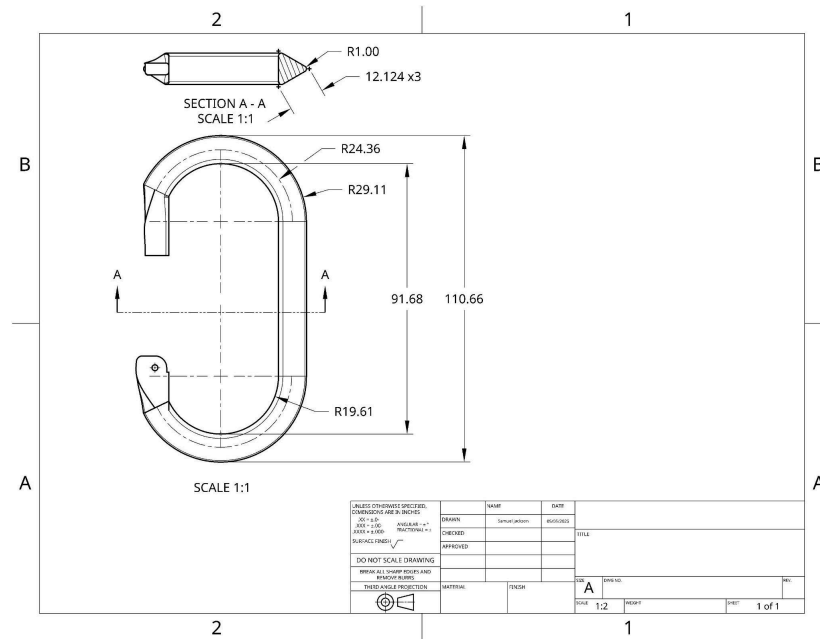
Initial drawing for the carabiner with a triangular cross-section
